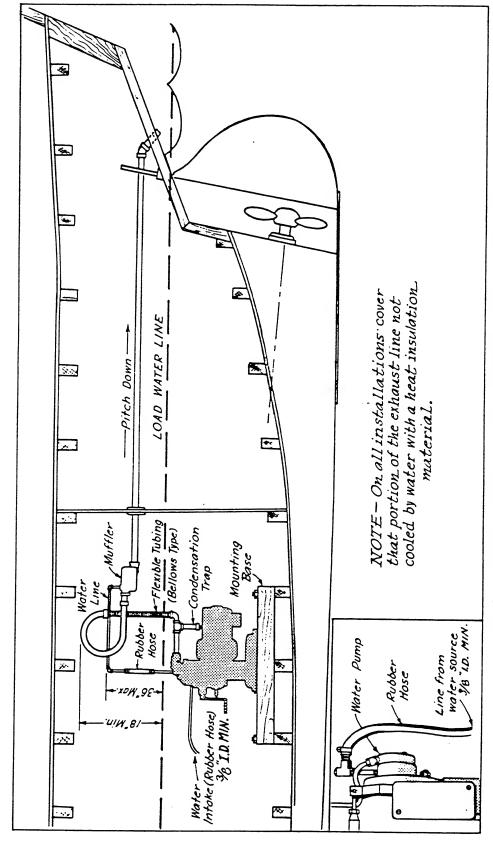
TYPICAL INSTALLATION - BELOW LOAD WATER LINE
